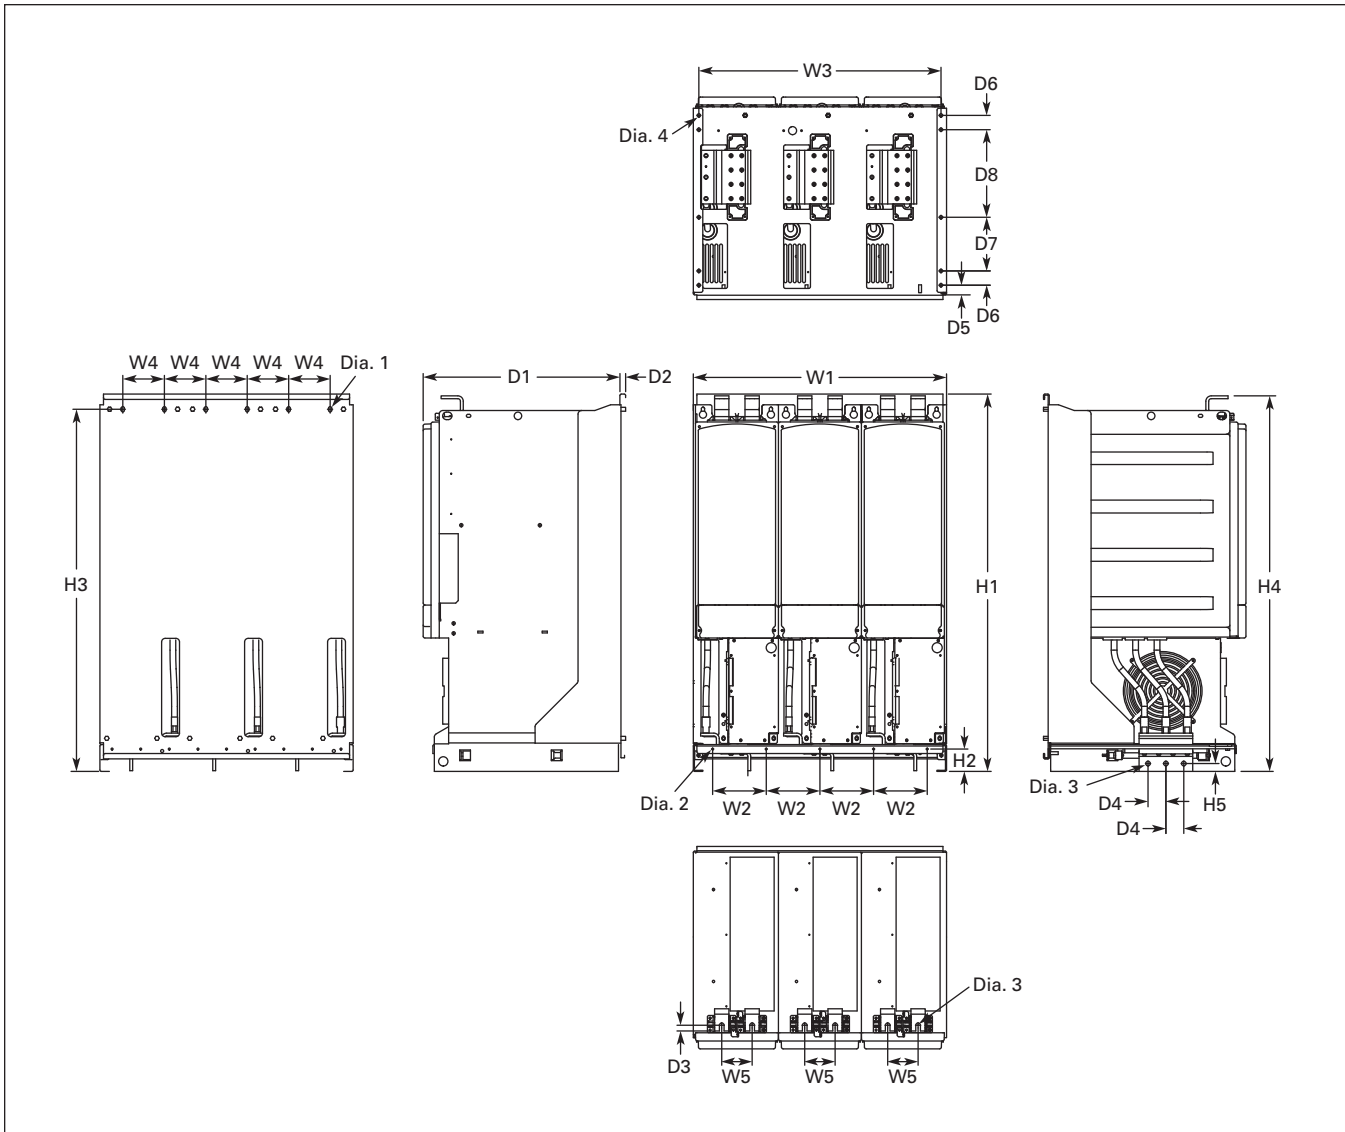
SPX9000 Dimensions, FR13 Open Chassis Inverter
